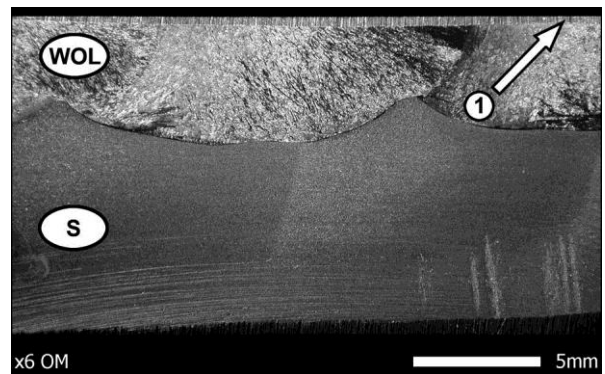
Macroscopic image of the EL-Hard 63 weld overlay layer. Grinding marks (1). Macroscopic cracks were not found.
